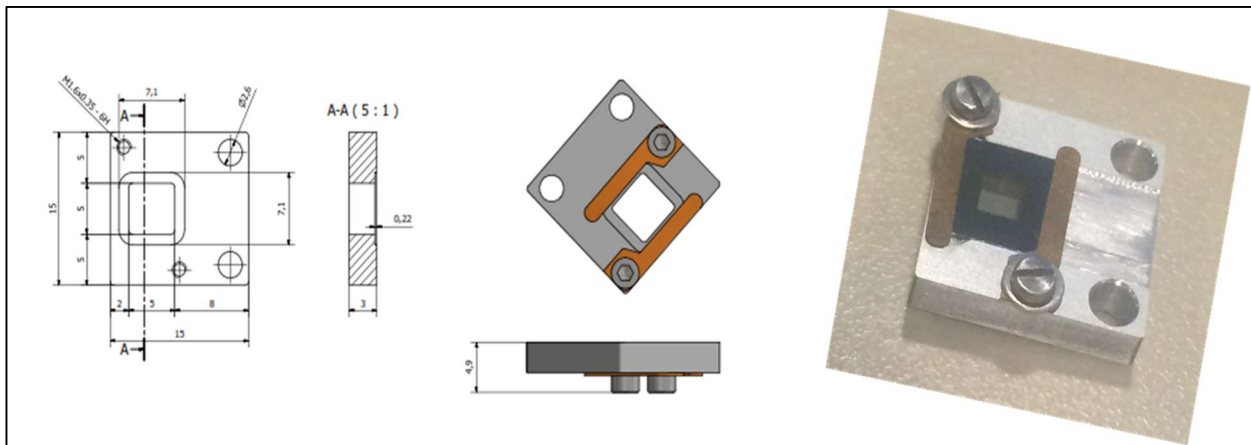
Custom-made aluminum holder with adjustable bronze clamps. It has two extra screw holes, so the holder can be assembled with a specific sample holder adapted for synchrotron measurements.
